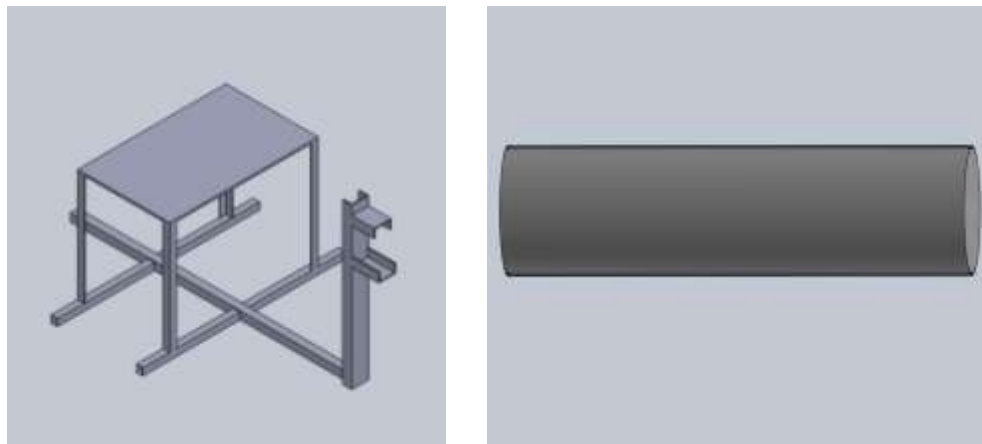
(a): Isometric View of Seat (b): Isometric View of Shaft
